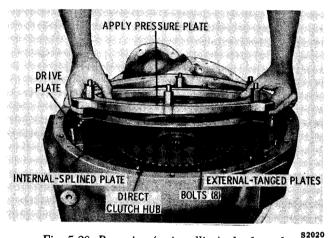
Removing (or installing) clutch apply plate and direct clutch plates (VH series)
